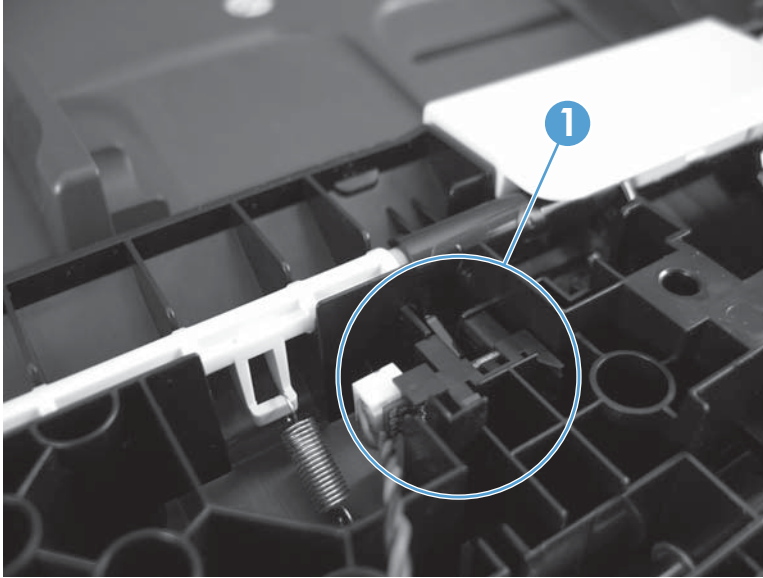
Remove the document feeder hatch cover (2 of 2)
